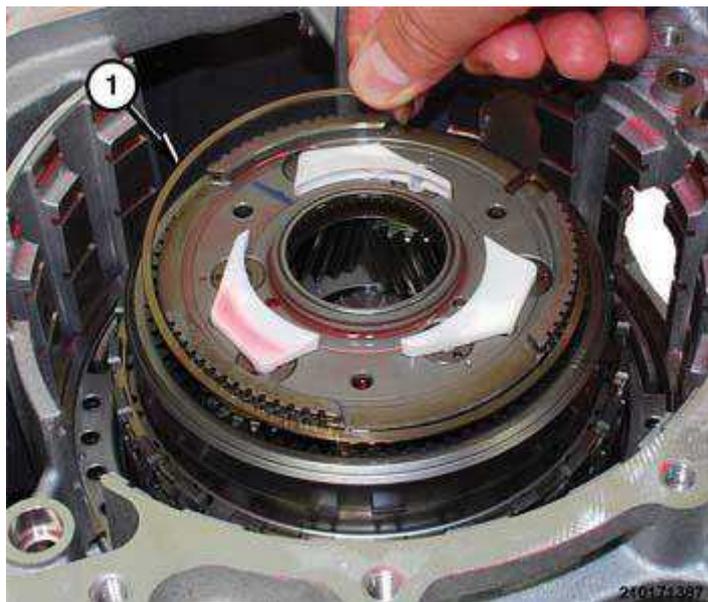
Middle/Rear Planetary Gear Snap Ring
